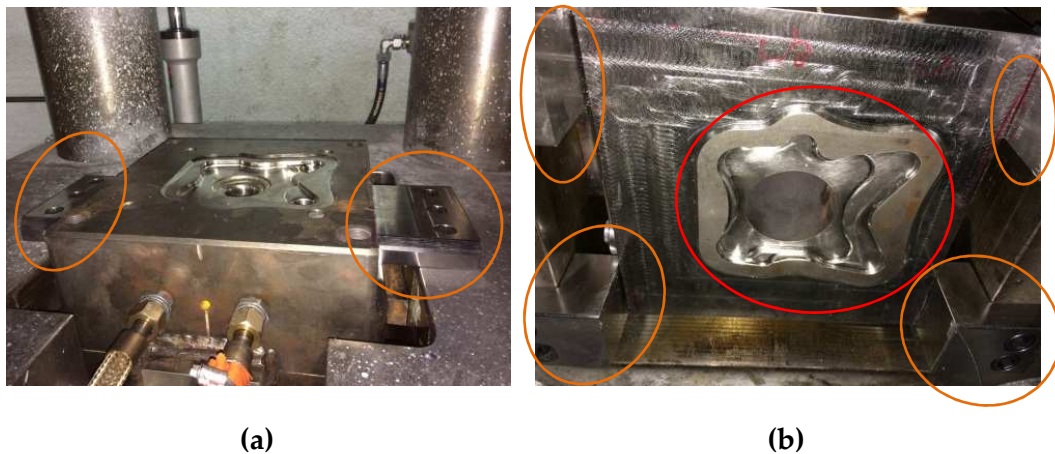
Pictures of (a) lower and (b) upper moulds with the “L” shaped parts to ensure a proper mould closing. Highlighted red zone: manufactured guide on the mould. Highlighted orange zones: “L” shaped parts.
